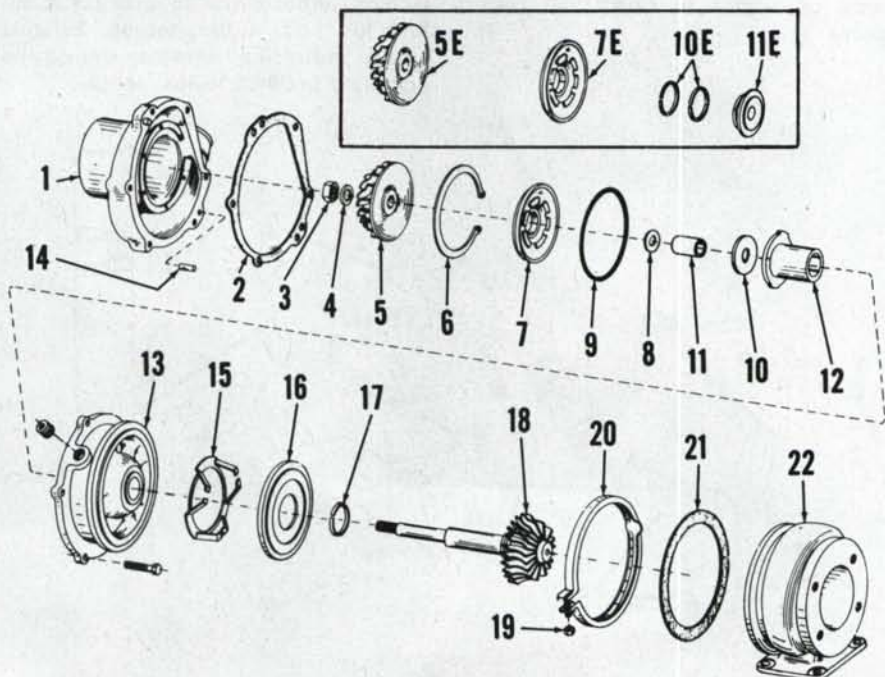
Exploded view of Thompson turbocharger unit used on diesel engines. Inset shows parts that are different on earlier unit.
